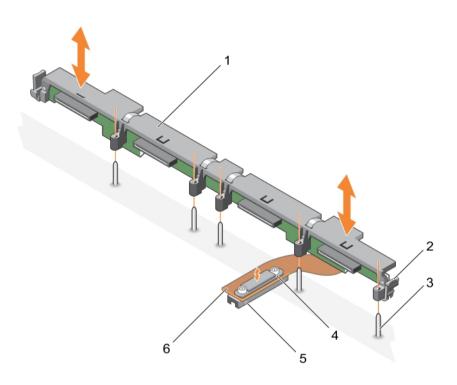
Removing a 2.5 inch (x4) SAS hard drive/SSD backplane
